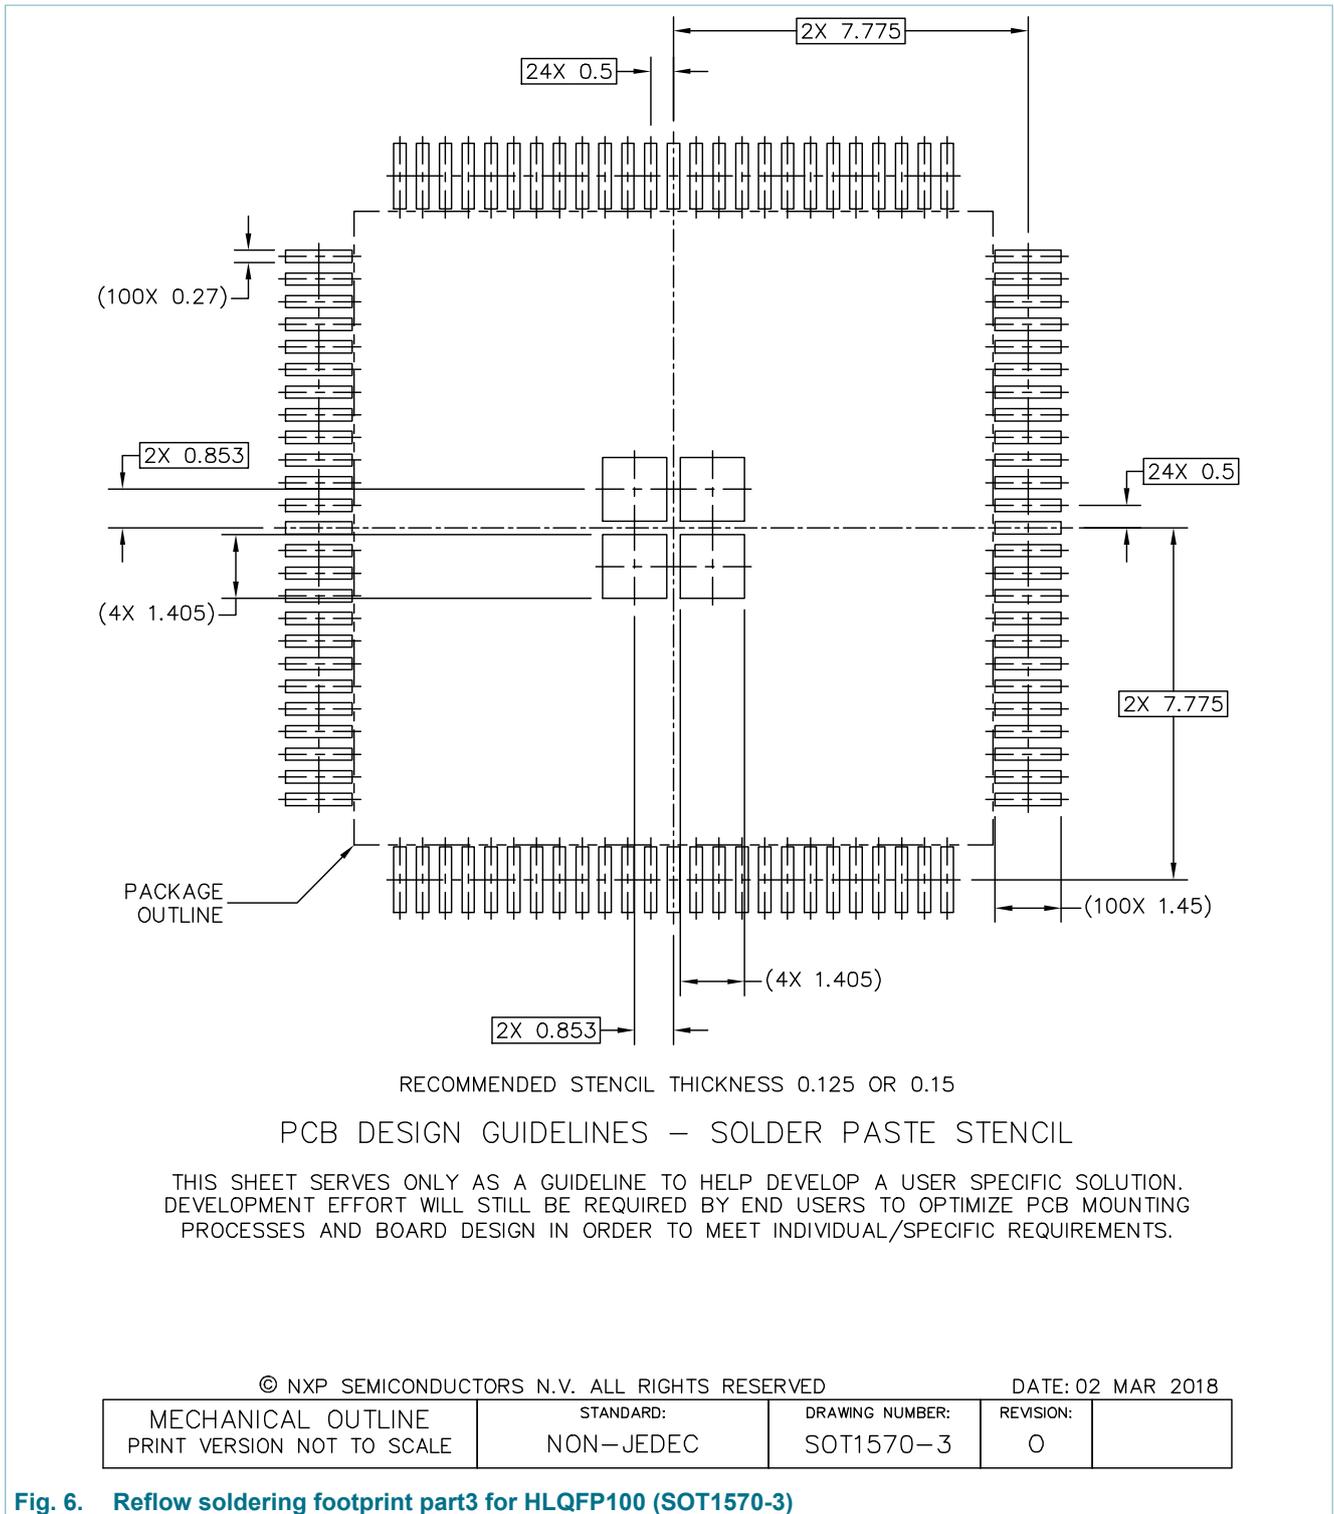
Reflow soldering footprint part3 for HLQFP100 (SOT1570-3)
